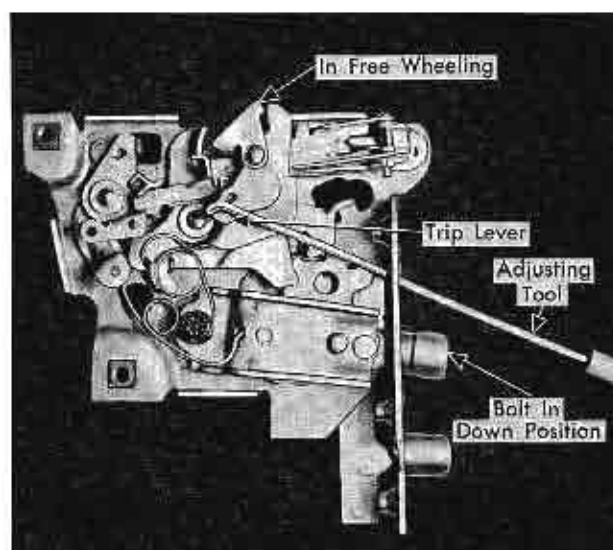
Adjusting Rear Door Lock Out of Free Wheeling
